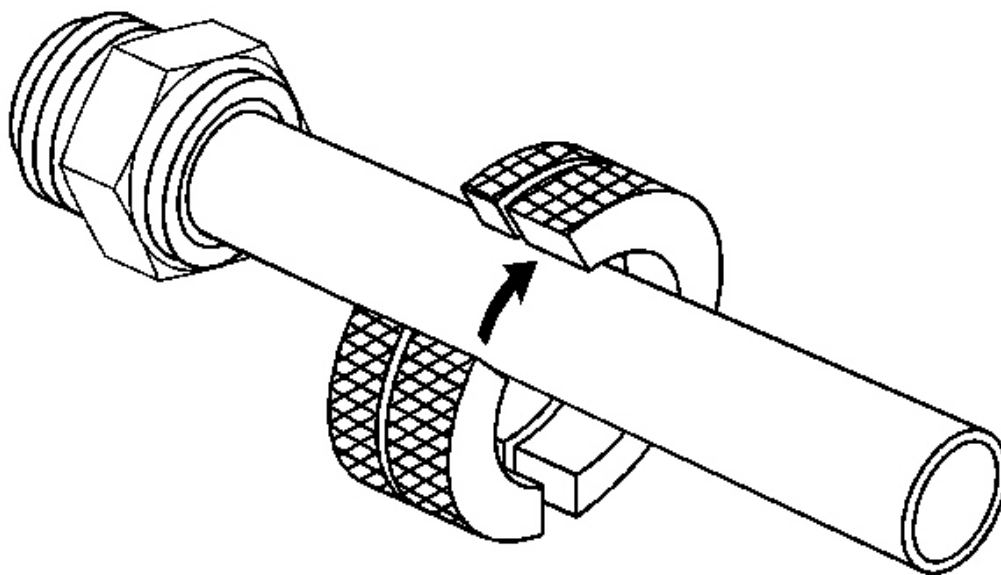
Installing J 41623-B Onto Generator Cooling Inlet Pipe
